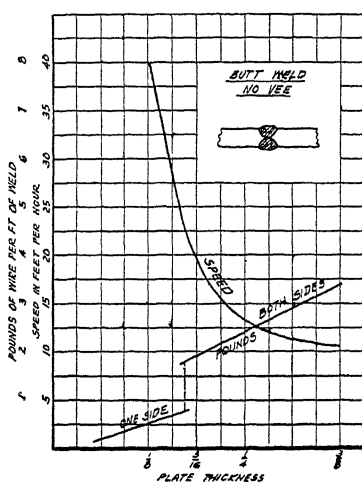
Chart of welding speed and amounts of bare or washed electrodes for square groove butt weld.
